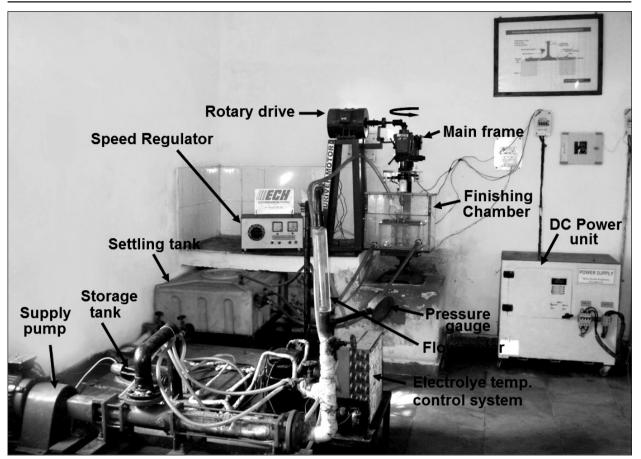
A Photographic View of the Developed Experimental Set up of Engine Valve Face
